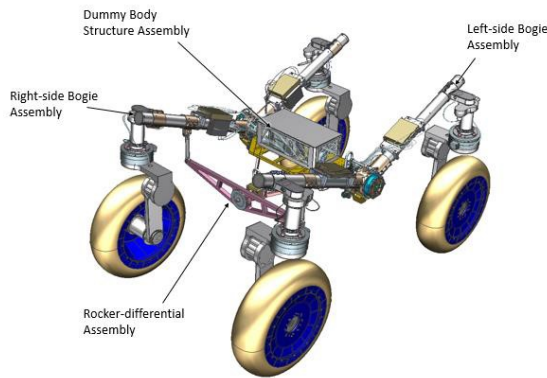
SFR CHABLIS BB Electro-Mechanical Assembly Component Identification
